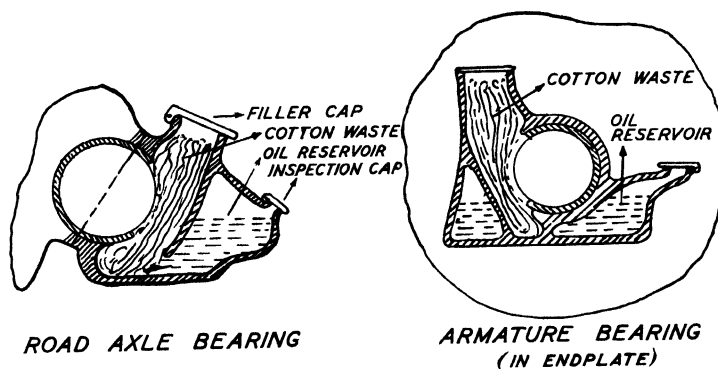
METHOD OF SLEEVE BEARING LUBRICATION
